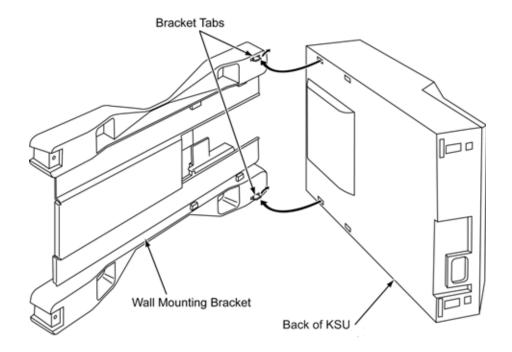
Attach 9.5" Chassis to Wall Mounting Bracket
